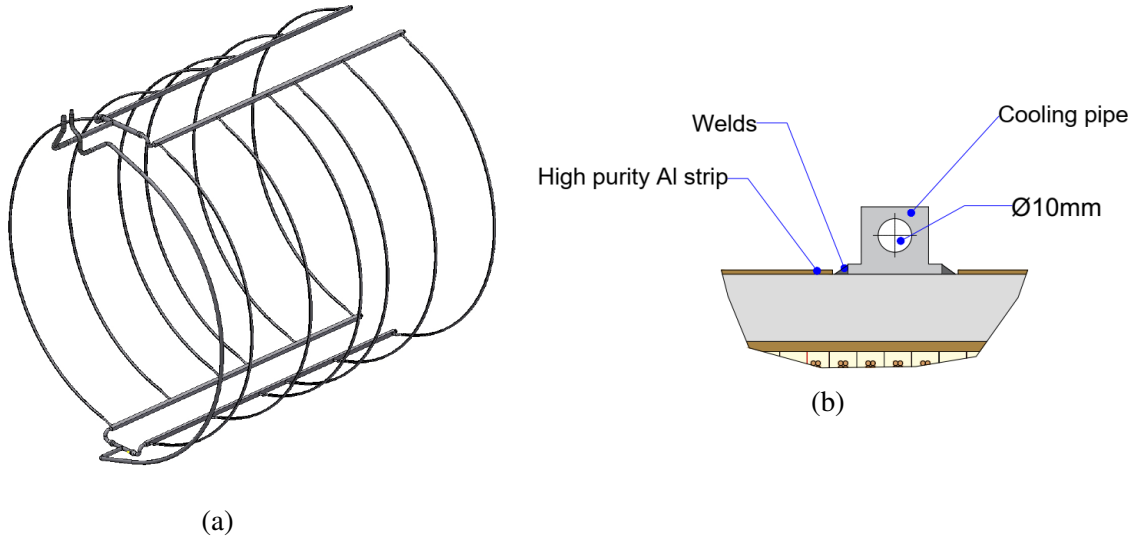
(a) Thermo-syphon circuit. (b) Connection of the cooling tubes and aluminum strip on the outer surface of the aluminum alloy support cylinder.
